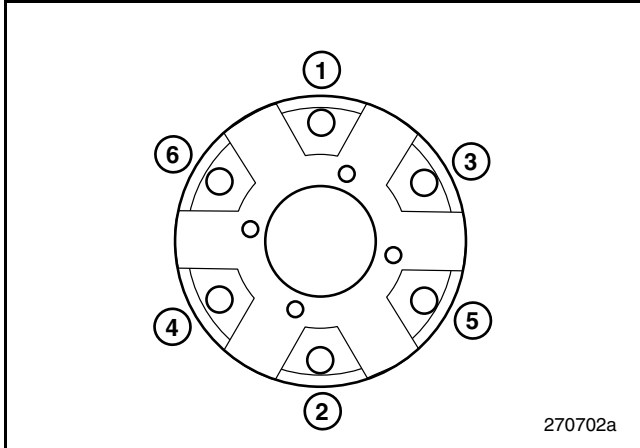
Hub Adapter Mounting Bolt Tightening Sequence
